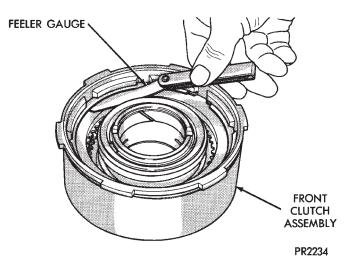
Front Clutch Return Spring and Piston MEASURING PLATE CLEARANCE
